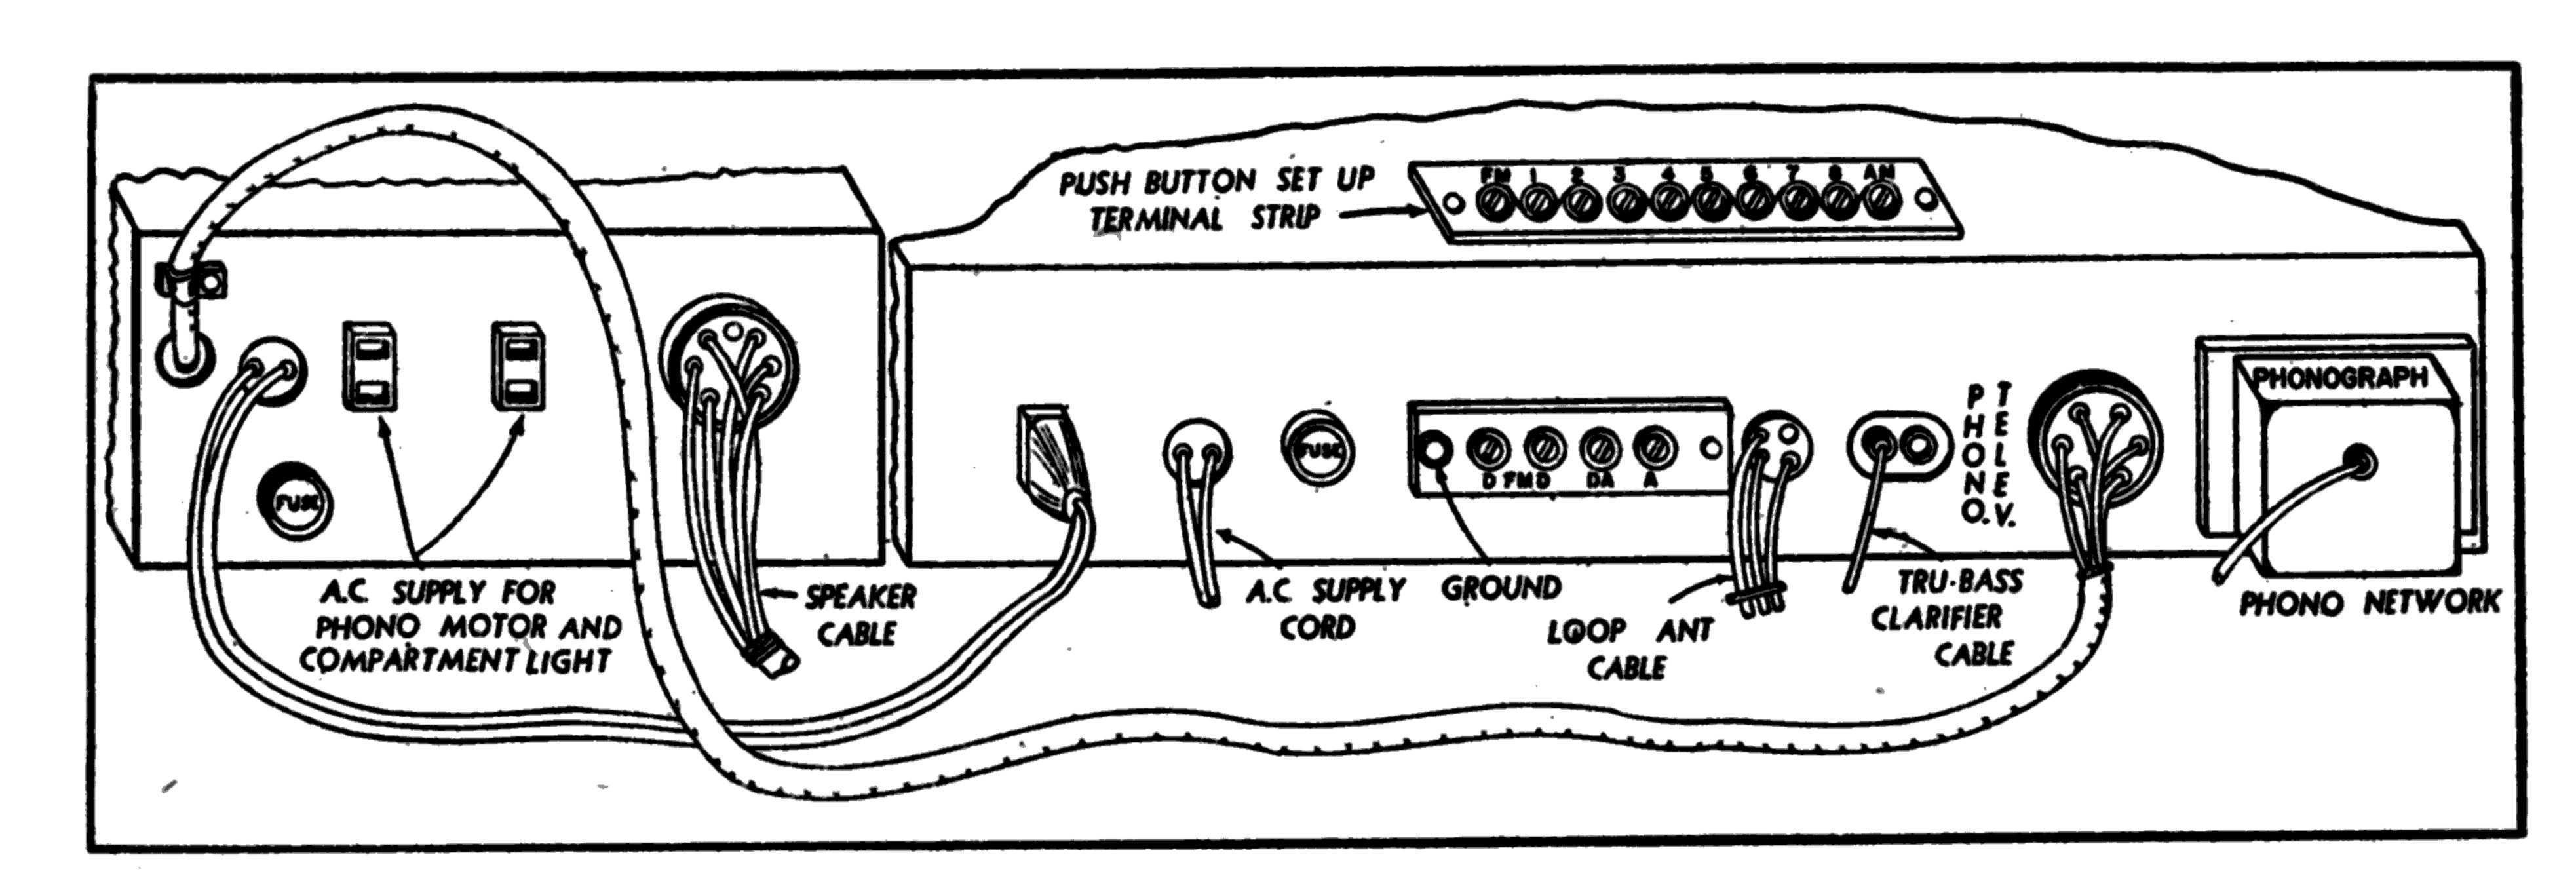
Showing Typical Wiring of Push Button Set-up Terminal Strip
